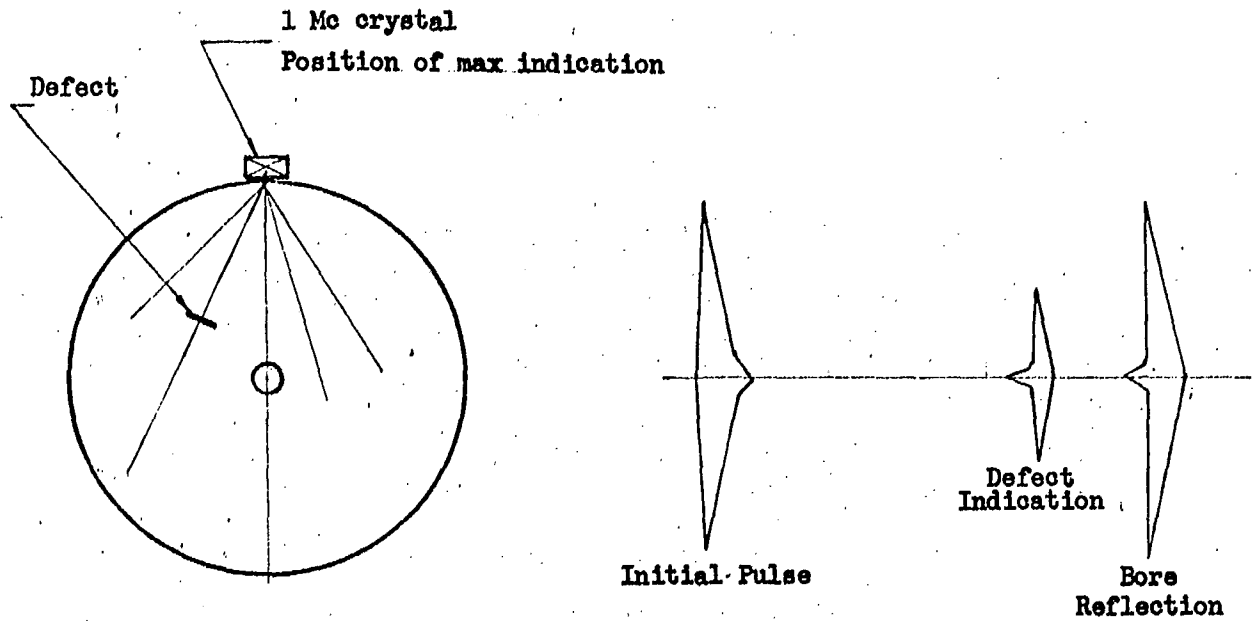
Step (a) in ultrasonic pinpointing to locate rotor defects.
